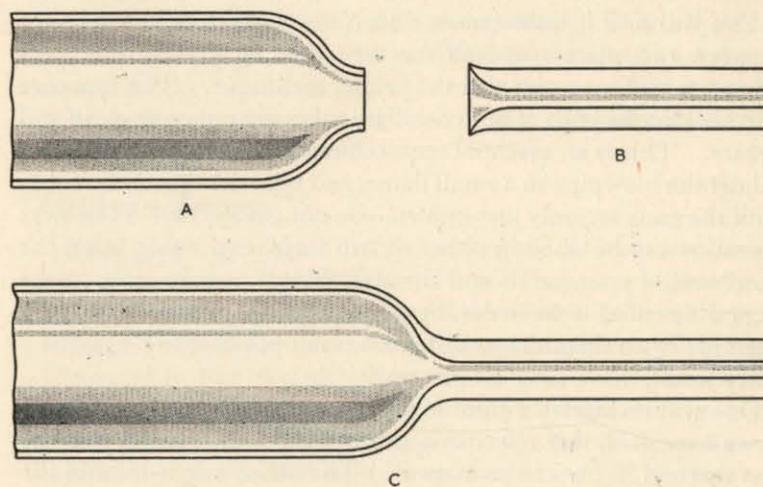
METHOD OF JOINING CAPILLARY TUBE TO A LARGE TUBE
